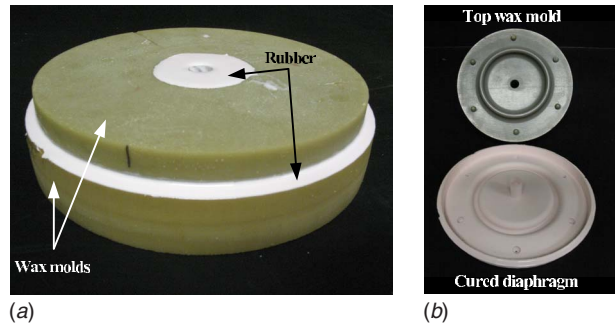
(a) Liquid rubber is cast in printed wax molds to fabricate the diaphragms. (b) Top wax mold and corrugated diaphragm after being separated from the molds.
